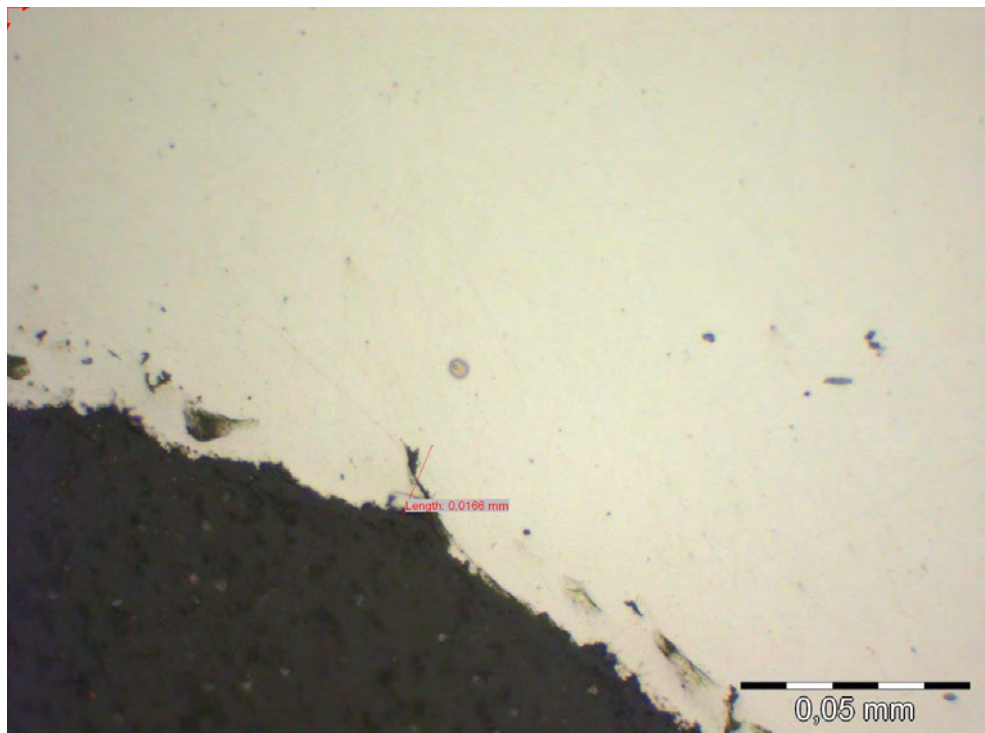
Cut five in crack at segment A, fifth ridge on barrel no. 14389
